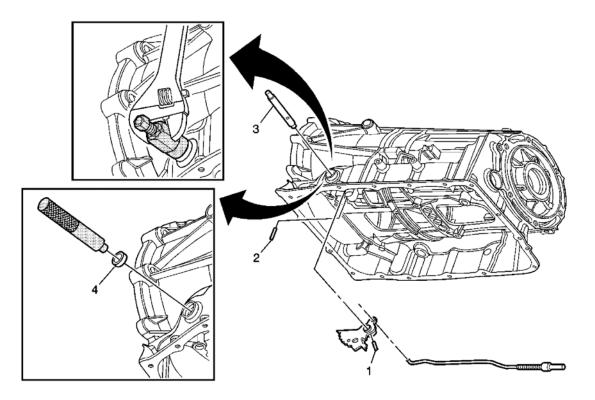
Manual Shift Shaft & Seal Courtesy of GENERAL MOTORS CORP.
